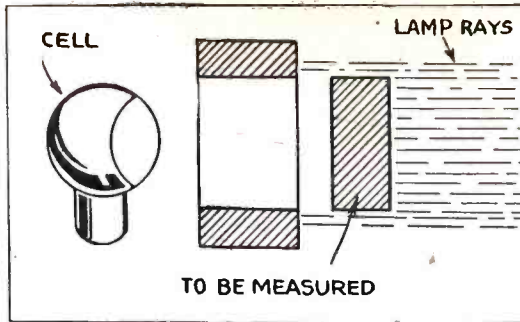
Photo-electric version of the go-no-go gage. Piece is passed if no light gets by. A second slightly larger gage is used to reject oversize parts.
